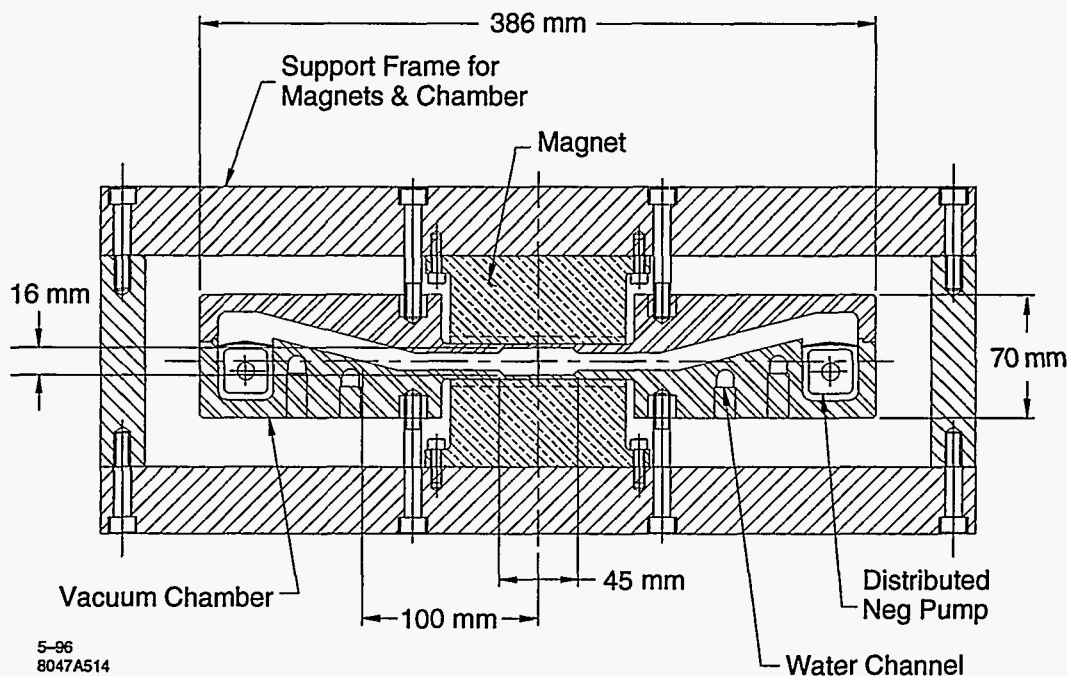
Schematic of the cross section of the wiggler vacuum chamber, the cross section of the wiggler magnet, and the supporting frame.
